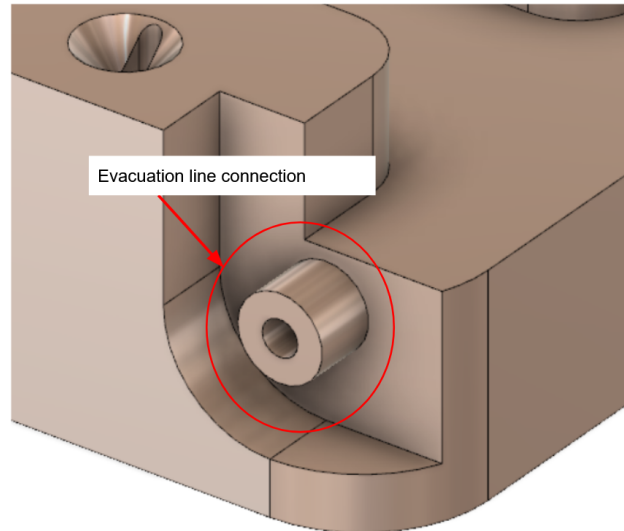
The solution needs a connection piece for an evacuation tube, similar to that on the commercial TF VTM shown here.
